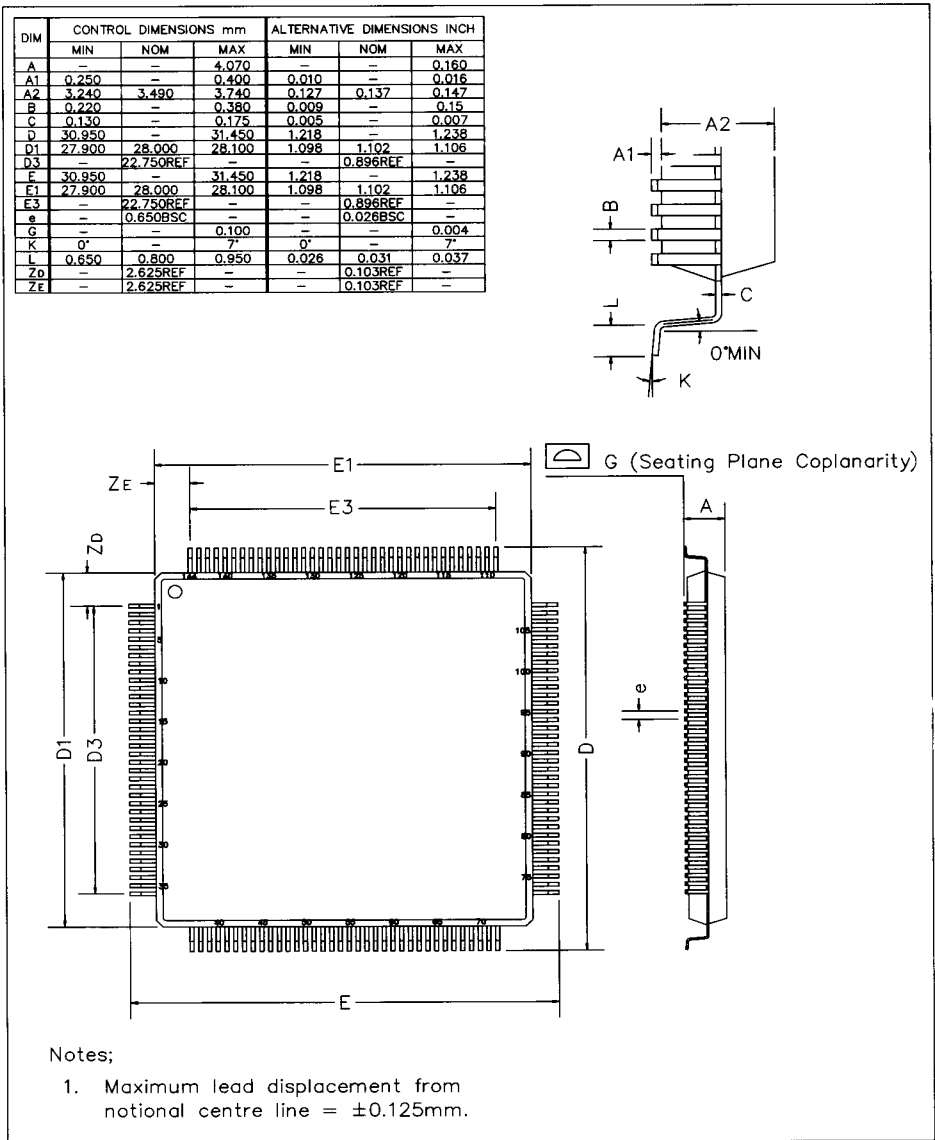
IMS G365 144 pin plastic quad flatpack package dimensions
